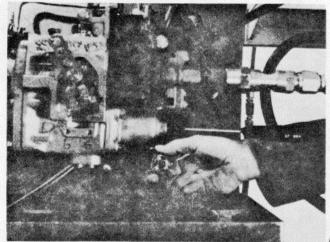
G-78. Adjusting Vacuum Valve in Fuel Pump Suction Line
